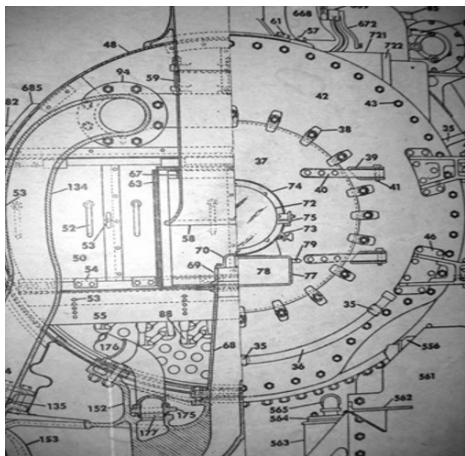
Locomotive drawing (Source: Acámbaro’s Museum)
